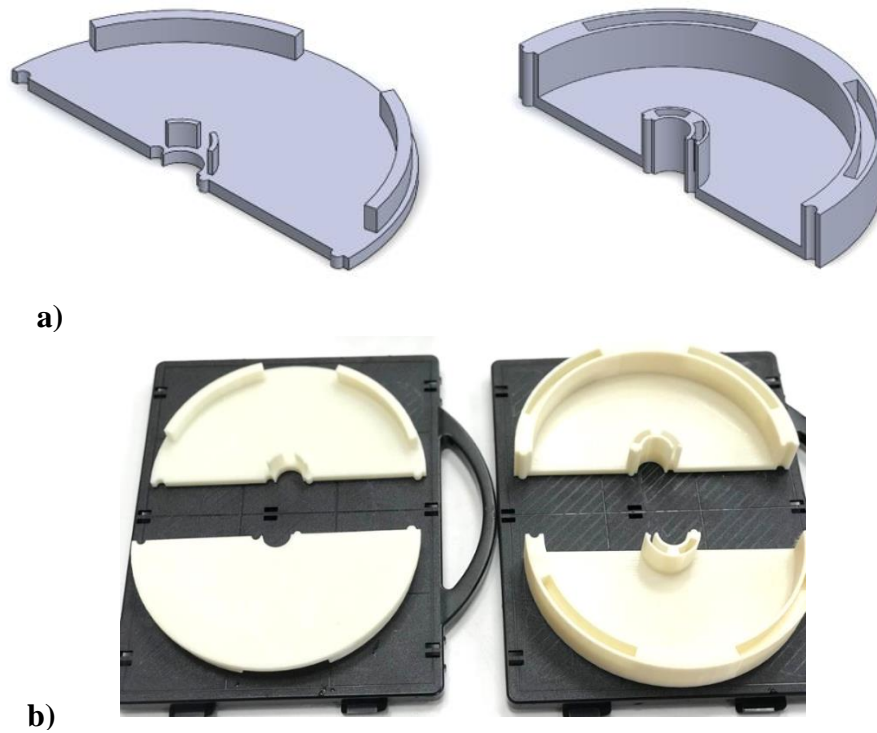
PID box: (a) 3D geometry, (b) 3D printed box
